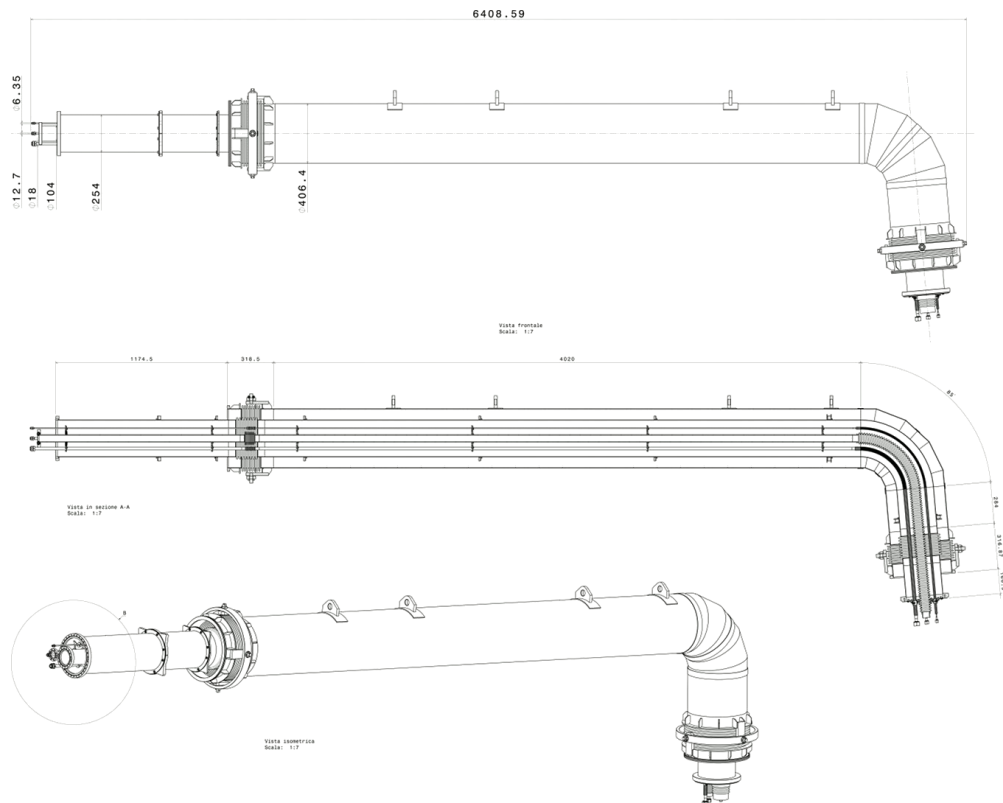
Technical drawing of the umbilical pipe that contains the cable guiding pipe in the XENON1T experiment.
